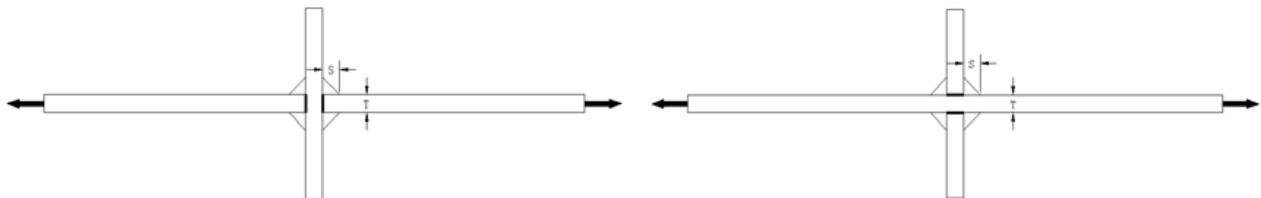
Load-Bearing Cruciform Joint (Left); Non-Load-Bearing Cruciform Joint (Right)
